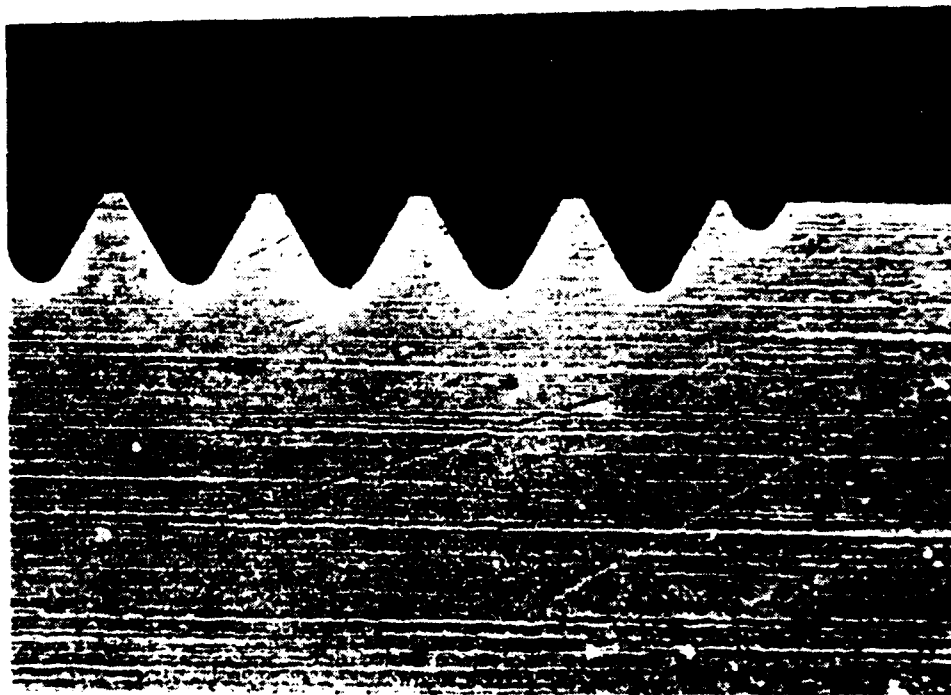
Macrograph of the macrostructure of a representative 0507 bolt thread region. Flow lines were indicative of machined threads. Mag. 12.5X.
